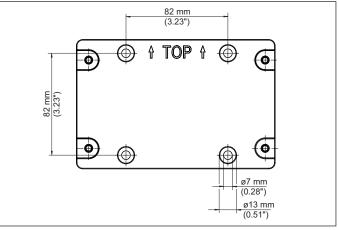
Mounting plate for wall mounting (VEGAMET 841, 842)
